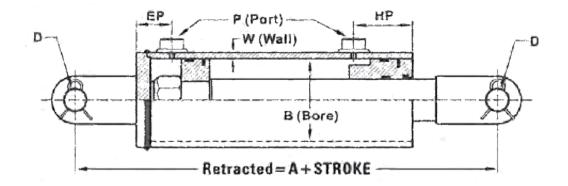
2 Inch Bore, 6 Inch Stroke Welded Hydraulic Cylinder Source: International Hydraulics US [15]
